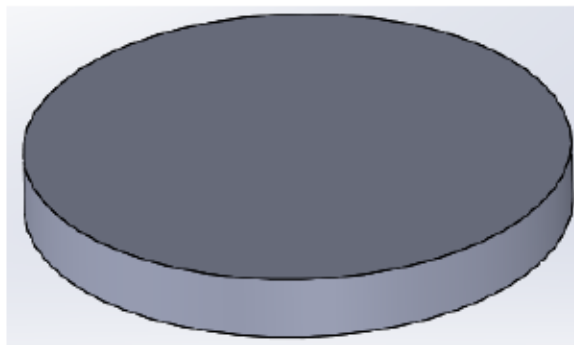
3D CAD model design for sputtering target 3D printed using binder jetting technology, diameter 63.5 mm, thickness 7.62 mm.
